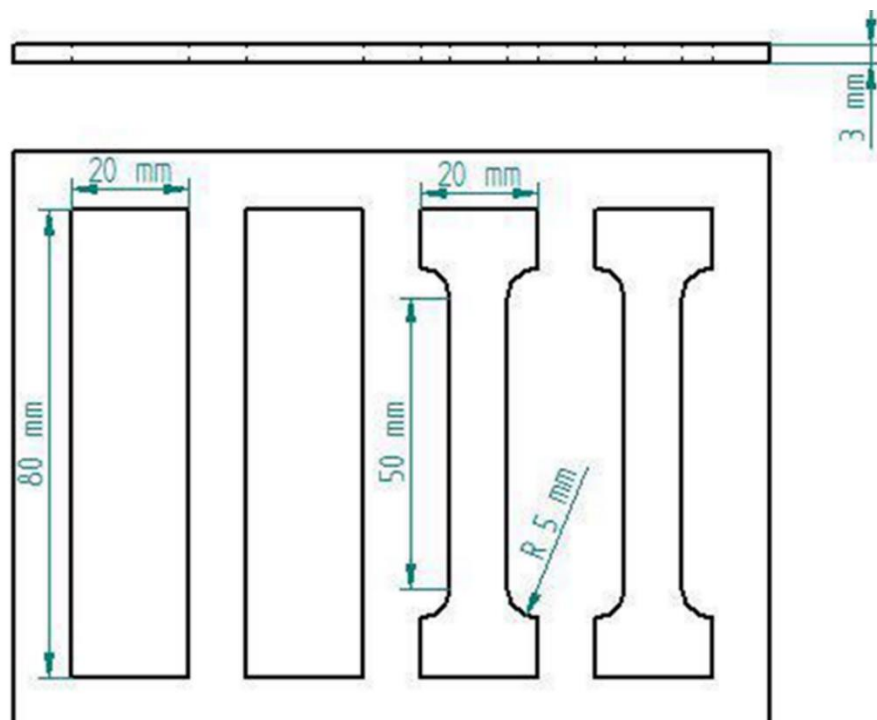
Tensile test (bone-shape) mould dimension for biocomposites
